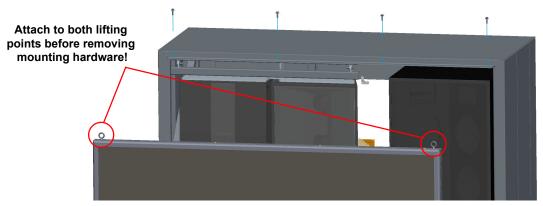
Grille Frame Removal (1500HD cabinet shown)
